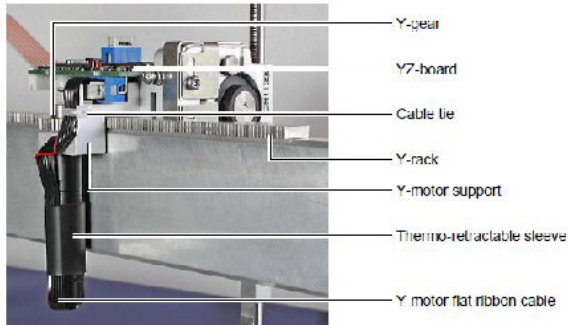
Y-Motor Assembly with Fixed Y-Motor Support
